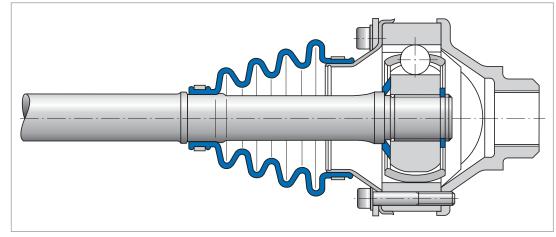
Bellows protects rear-axle bearing from dirt (radial movement)
